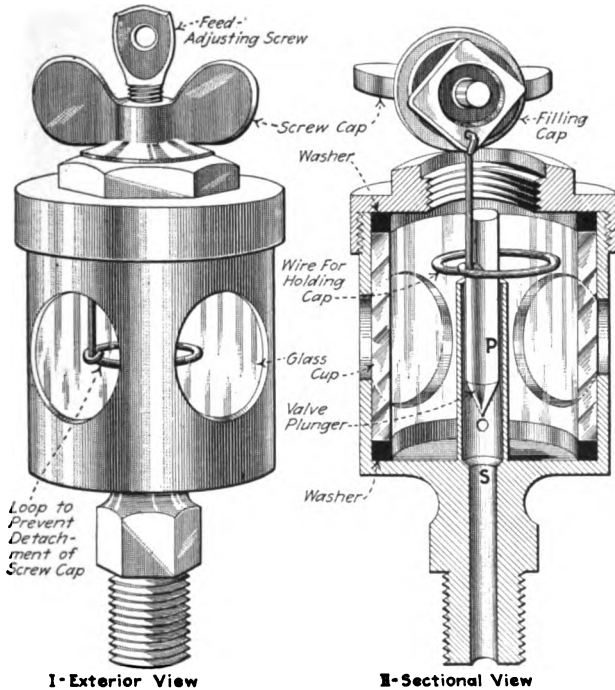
Crank-pin oiler for attachment to connecting rod. (The valve plunger, *P*, rises and falls as the crank pin rotates thus controlling the oil feed. With the engine stopped, *P* rests against the seat *S* shutting off the oil flow. American Injector Co.)
